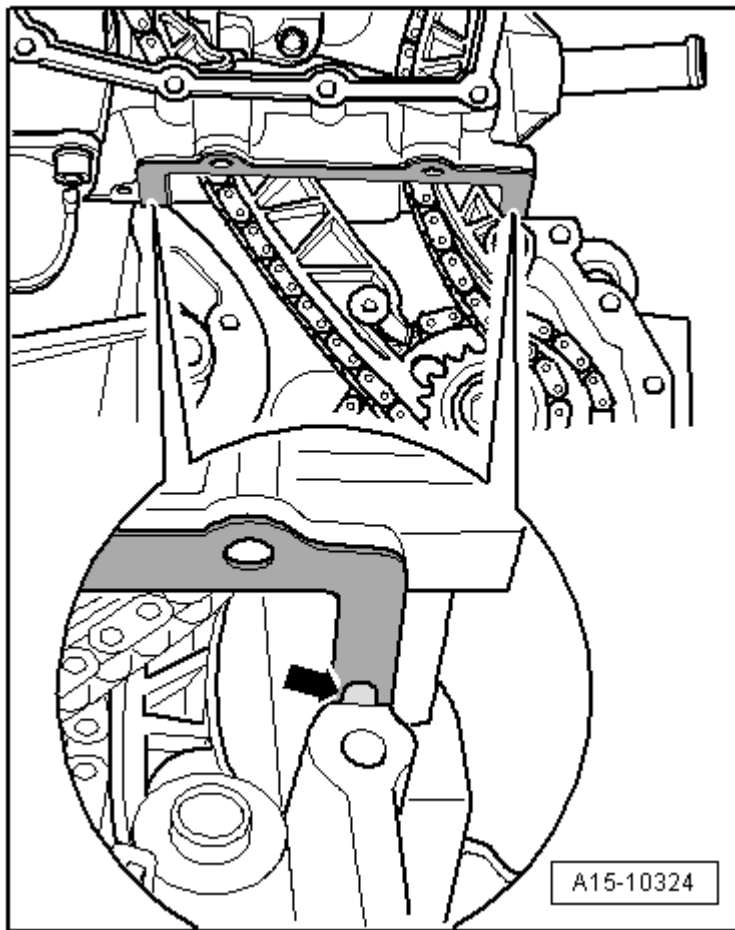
Cleaning Holes -Arrow- In Cylinder Head Gasket Of Old Sealant
